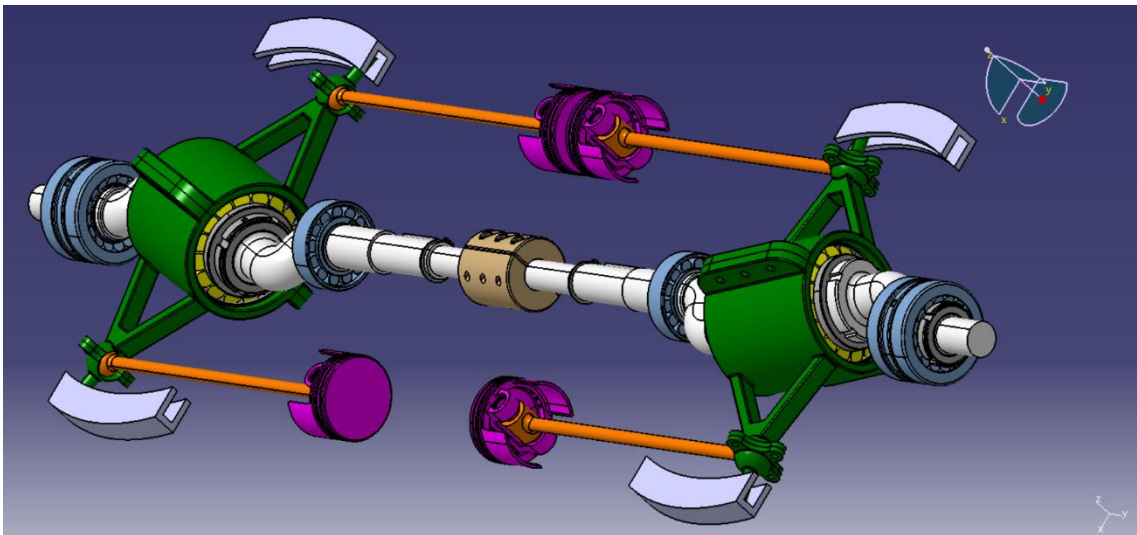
Engine assembly without distribution system in CATIA V5
